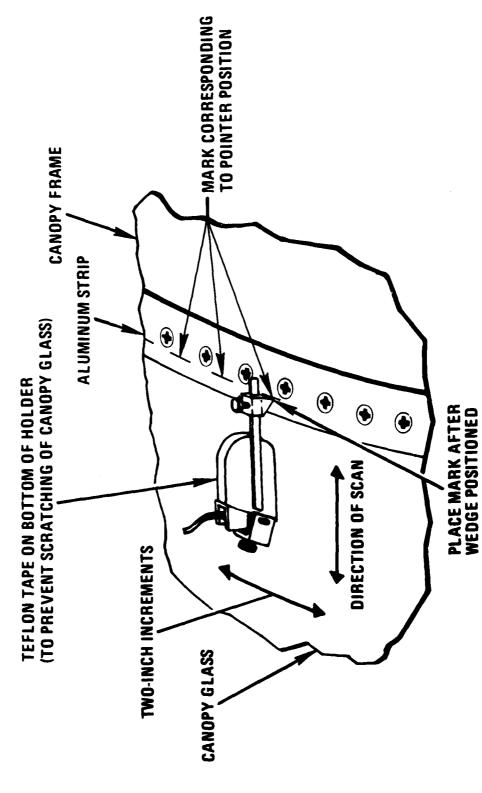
TYPICAL PLACEMENT OF TRANSDUCER HOLDER ON AREA OF INSPECTION — ANGLE BEAM TECHNIQUE
